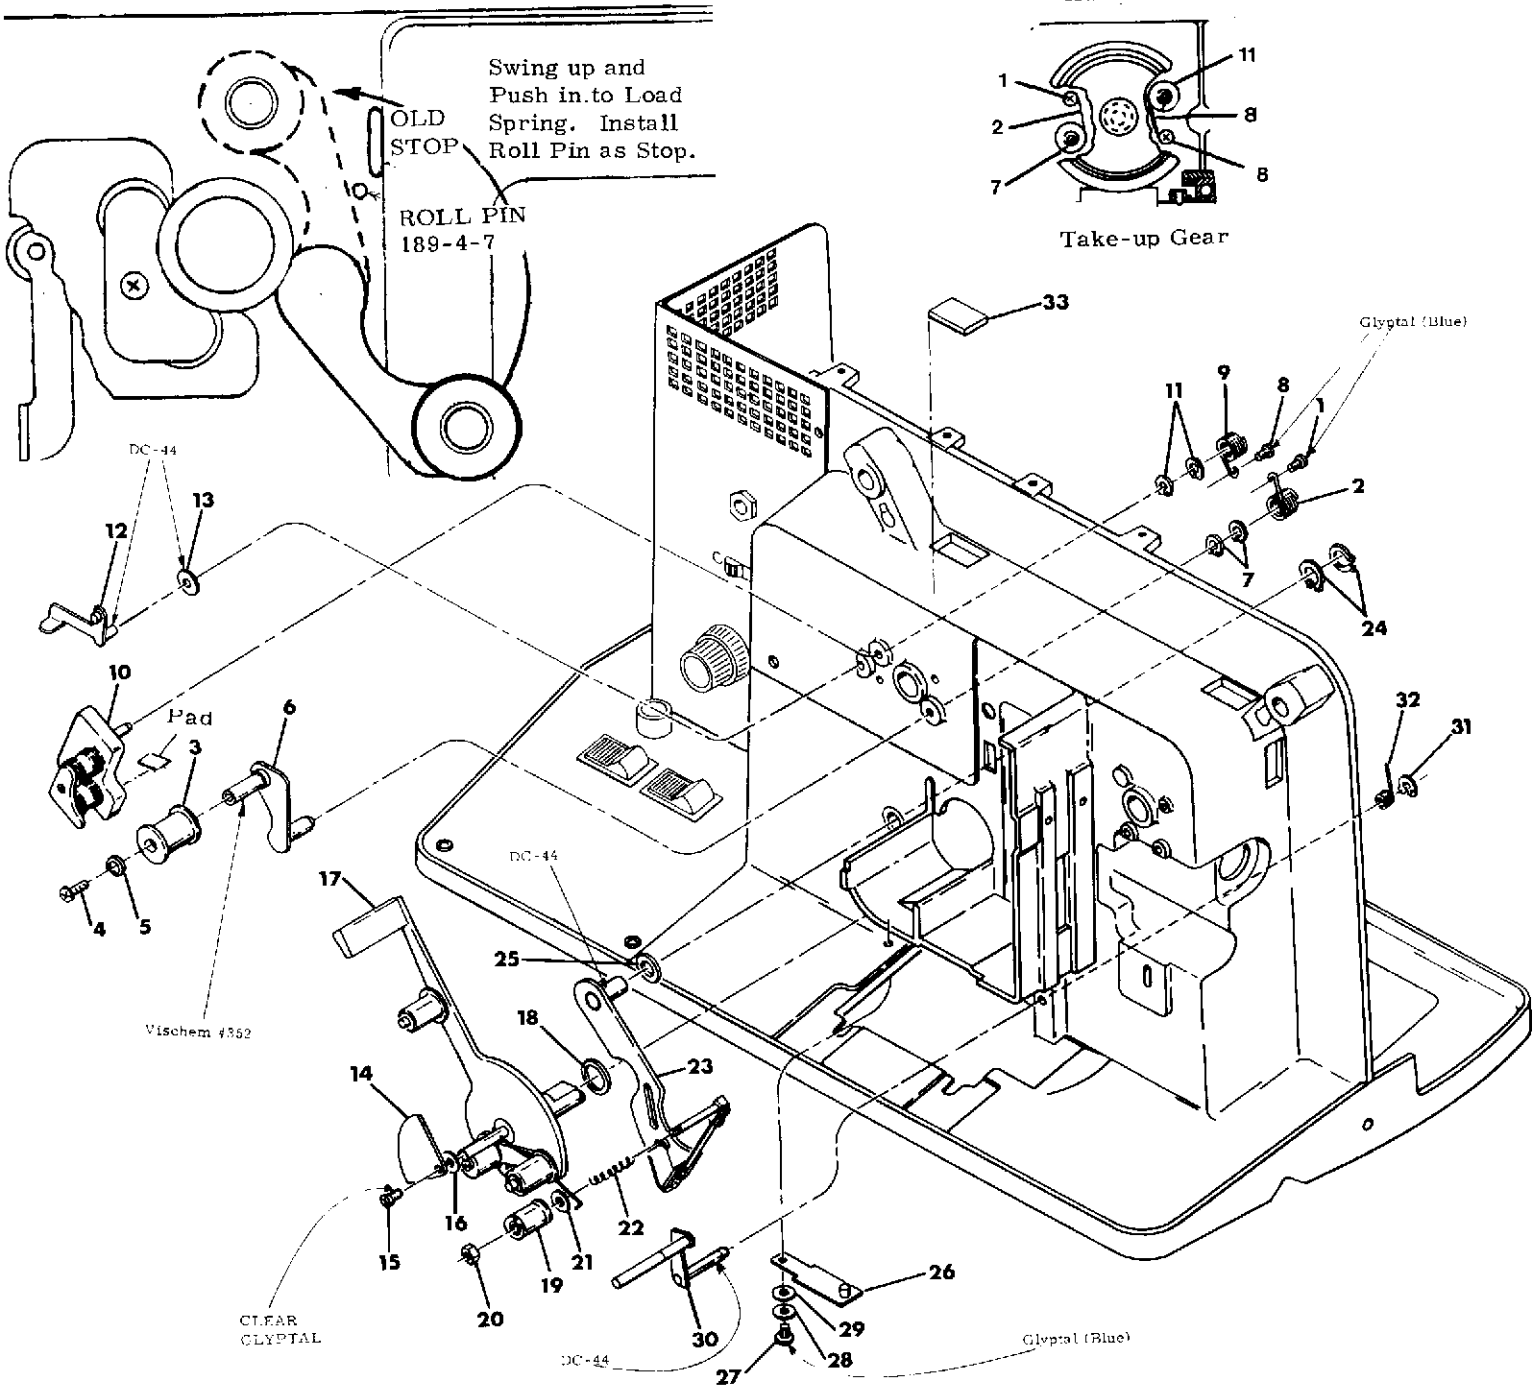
DISASSEMBLY AND REASSEMBLY
